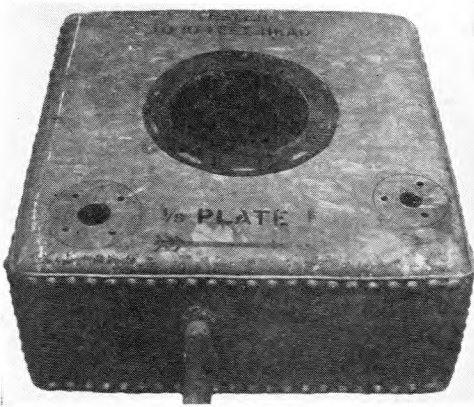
THE TANK WITH BOTH HOLES CUT READY FOR THE FLANGES.
